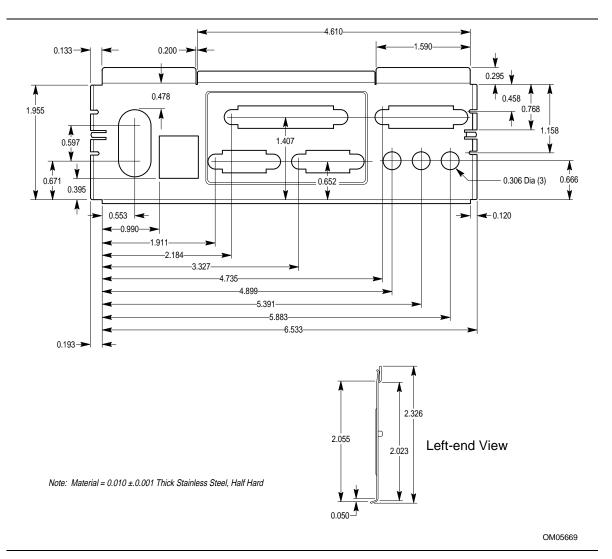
Back Panel I/O Shield Dimensions (ATX Chassis-Dependent)
